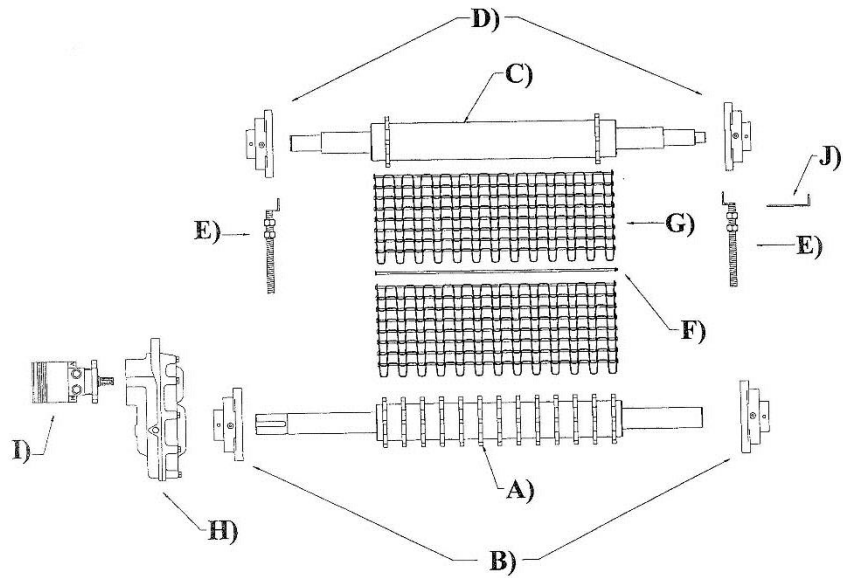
Conveyor Assembly (Chandler Spreaders, 2013).
